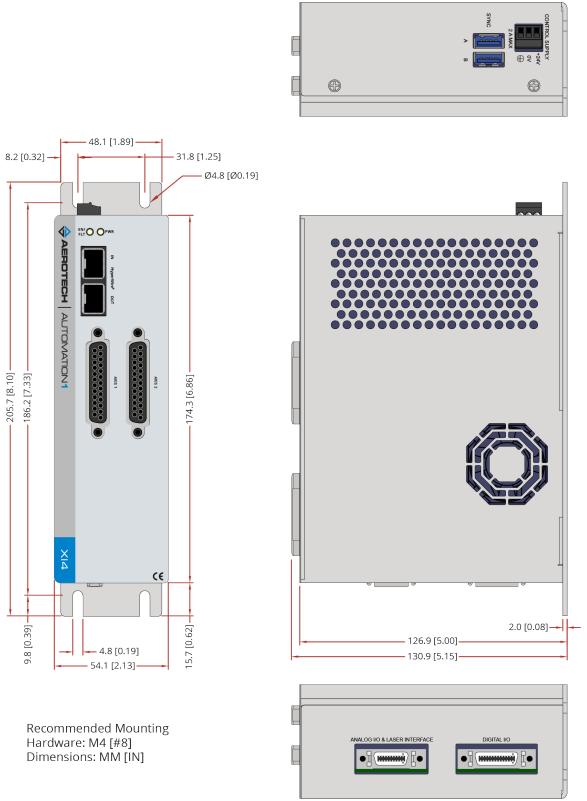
Dimensions [-2P1 (Standard 2-Axis)]
